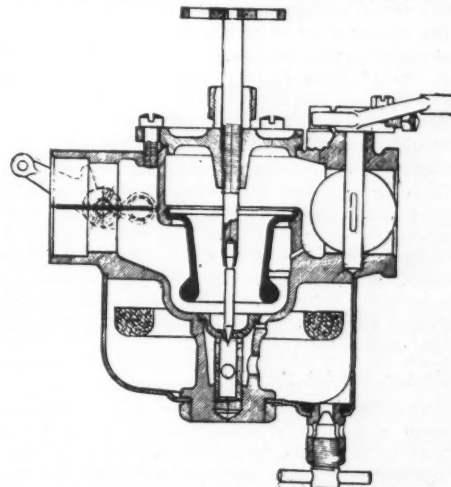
Section through Holley carburetor with needle-valve adjustment on the top
